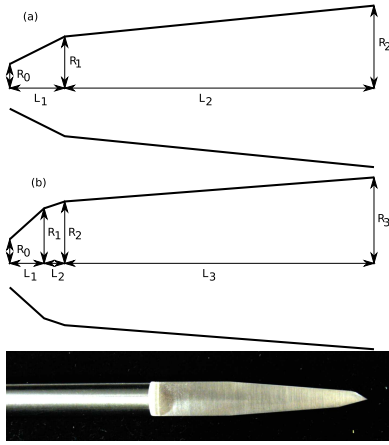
Top: A schematic diagram of (a) 2-section and (b) 3-section multiple flare-angle horns. Bottom: The high speed steel machine tool used for the fabrication of the drilled horn prototype.
